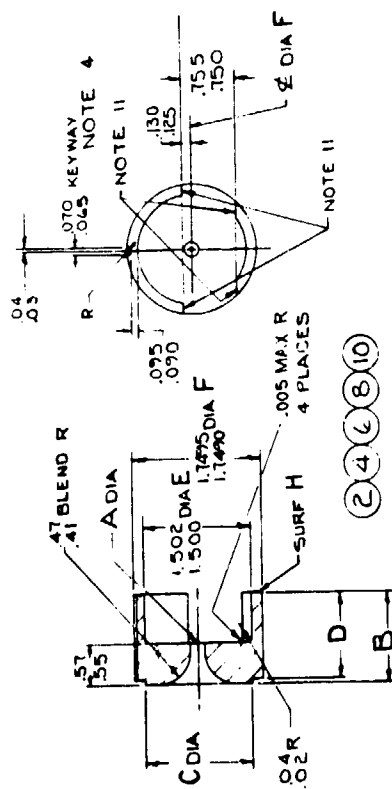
Turbine Simulator Blade Assembly (Drawing No. 119C2976 (Rev. A)).
